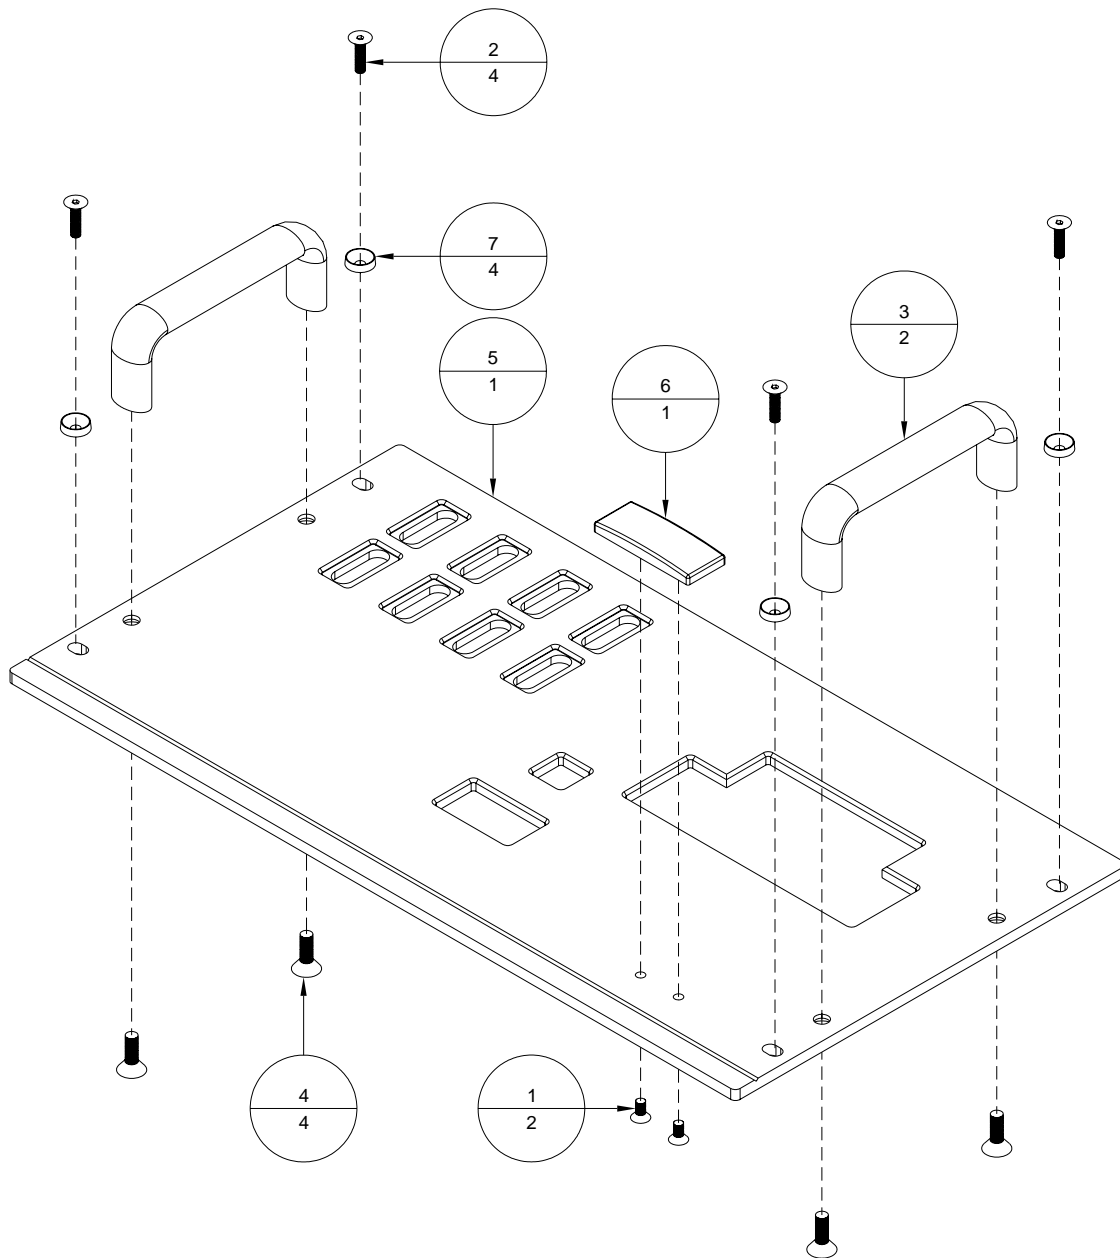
Computer Faceplate Assembly, BK1700 (9103128A)
